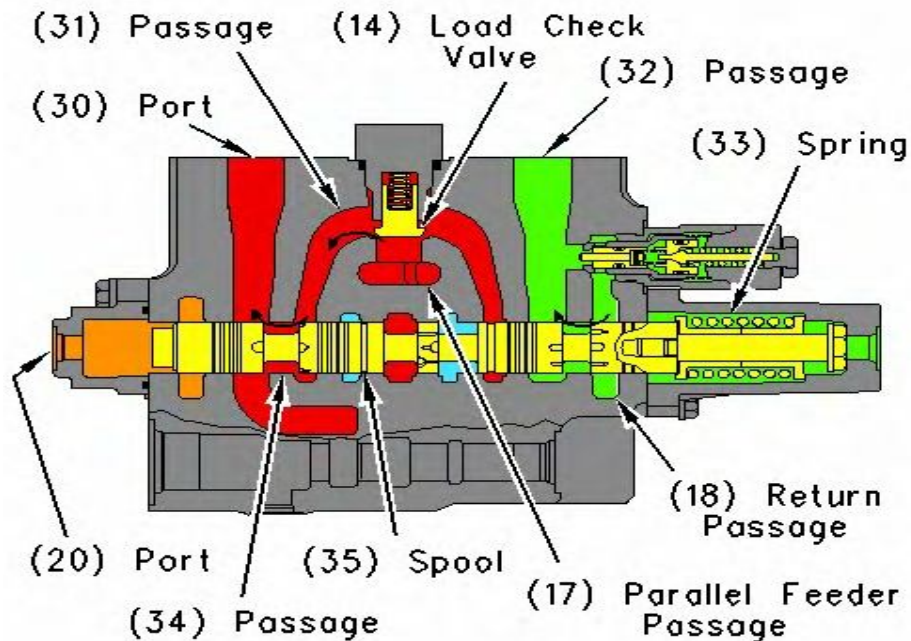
Boom I Control Valve (Boom Raise Position)
